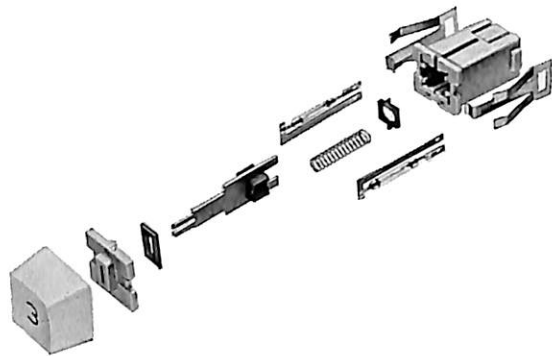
Element parts composing FES-1N type pushbutton switch.
